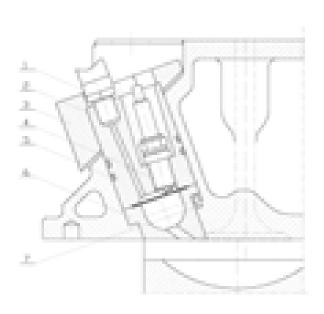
Experimental engine head with prechamber 1 – flame extinguisher, 2 – prechamber body 3 – retaining cover, 4 – spark plug 5 – sealing ring, 6 – prechamber 7 – chamber dowel pin
